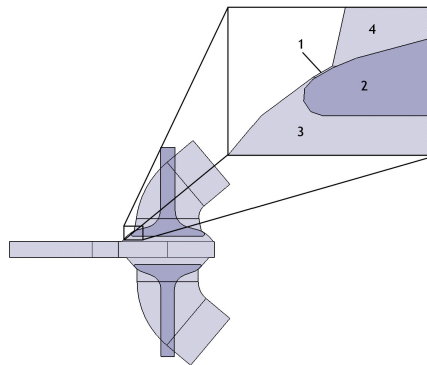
Detailed view of the valve gap: 1 - Gap; 2 - Valve head; 3 - Combustion chamber; 4 - Port
